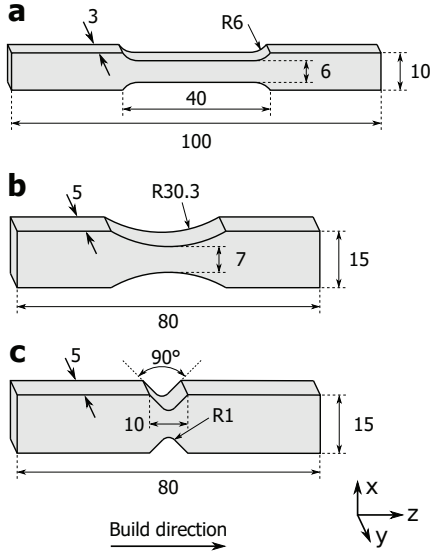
Dimensions of the specimens: (a) Tensile specimen; (b) Unnotched fatigue specimen; (c) Notched fatigue specimen.
